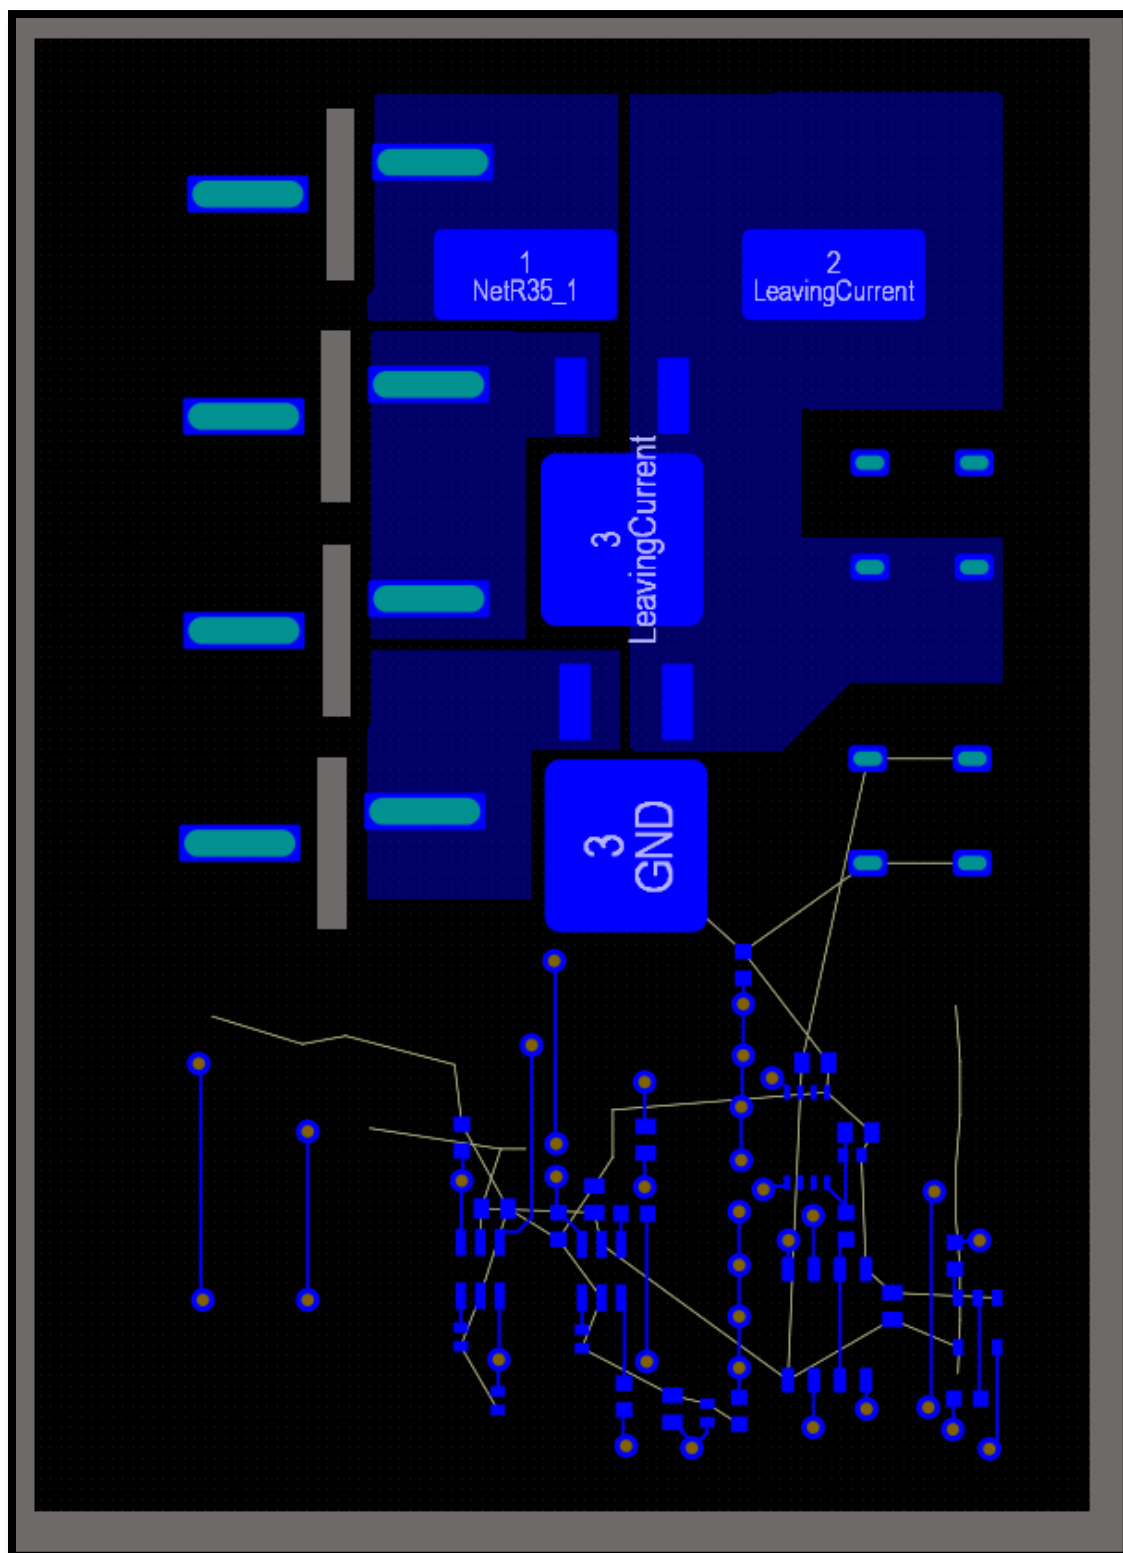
The 2D View of the Bottom Layer of the Initial PCB
